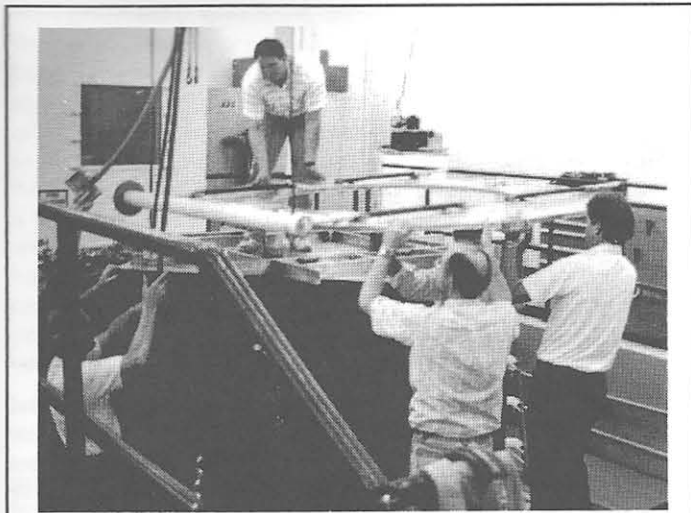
All hands mounting Top Plate assembly to shaker. Project student leader, Tracy Rose is on top of the job.
